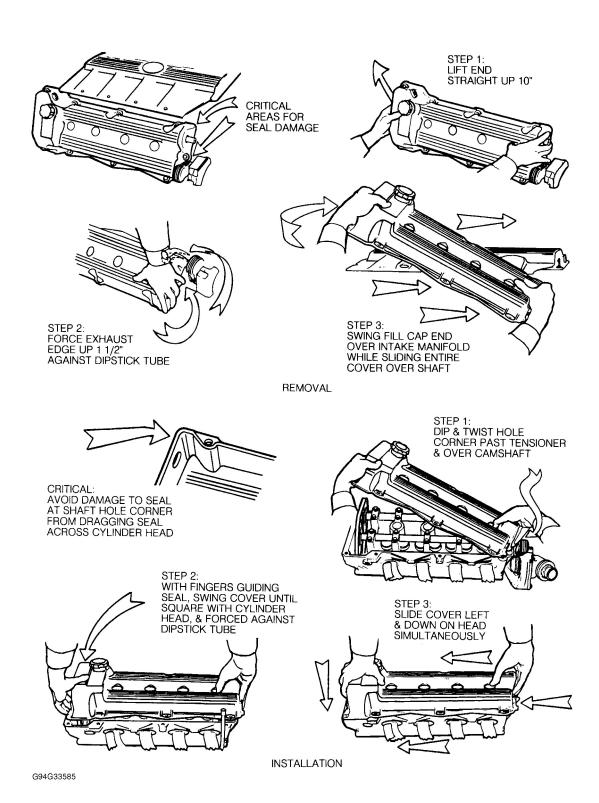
Removing Left Cam Cover Courtesy of GENERAL MOTORS CORP.
